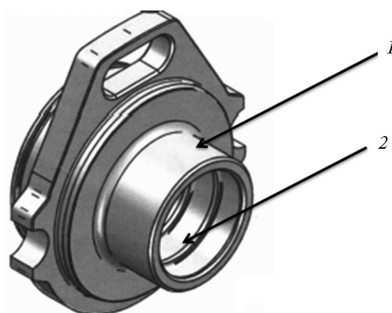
Points on machined components indicating areas where the surface roughnesses were measured: 1 – OD; 2 – groove.
